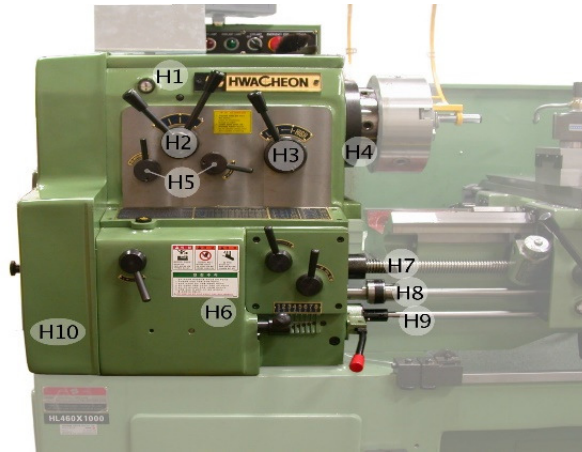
Illustrates the Working Model of the Lathe Machine with its Assembly Nomenclature of Headstock.
